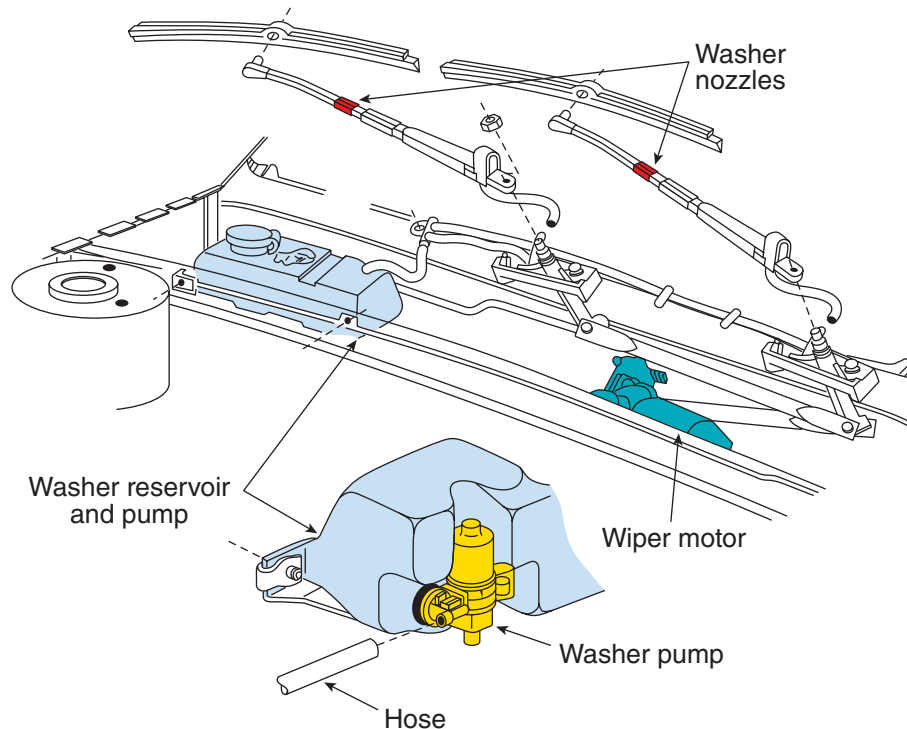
Parts of a windshield wiper and washer assembly.
